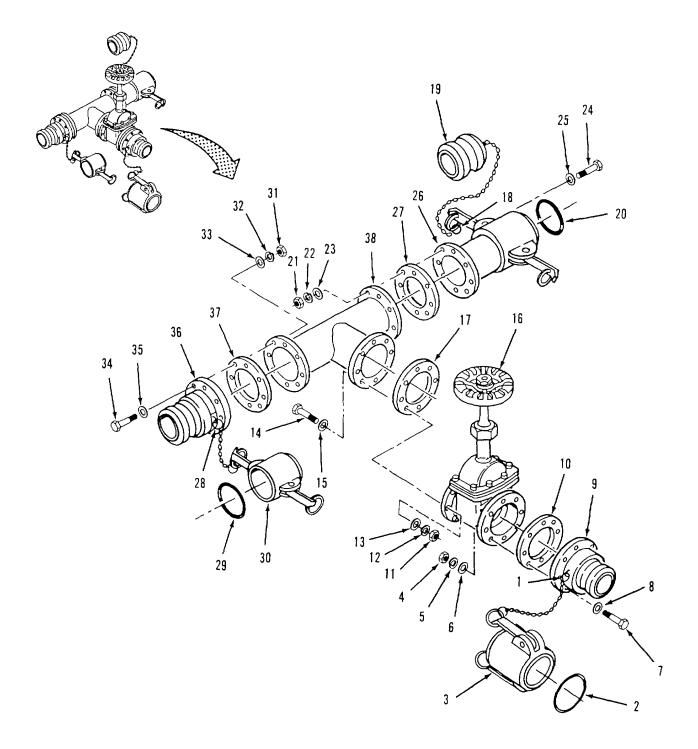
Tee and Gate Valve assembly (9114-Y1) Disassembly.
